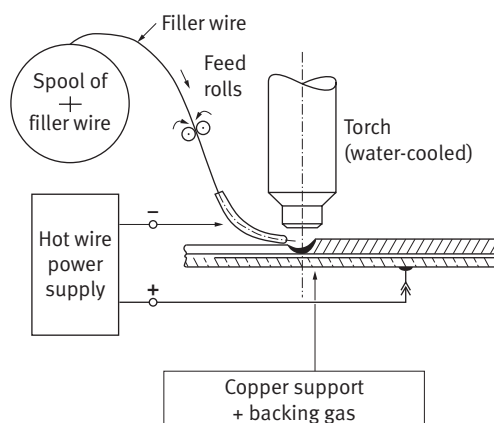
Example of automatic welding using the GTAW process. The filler metal can be used either cold or hot. In the latter case, it is resistance heated via an auxiliary current source
